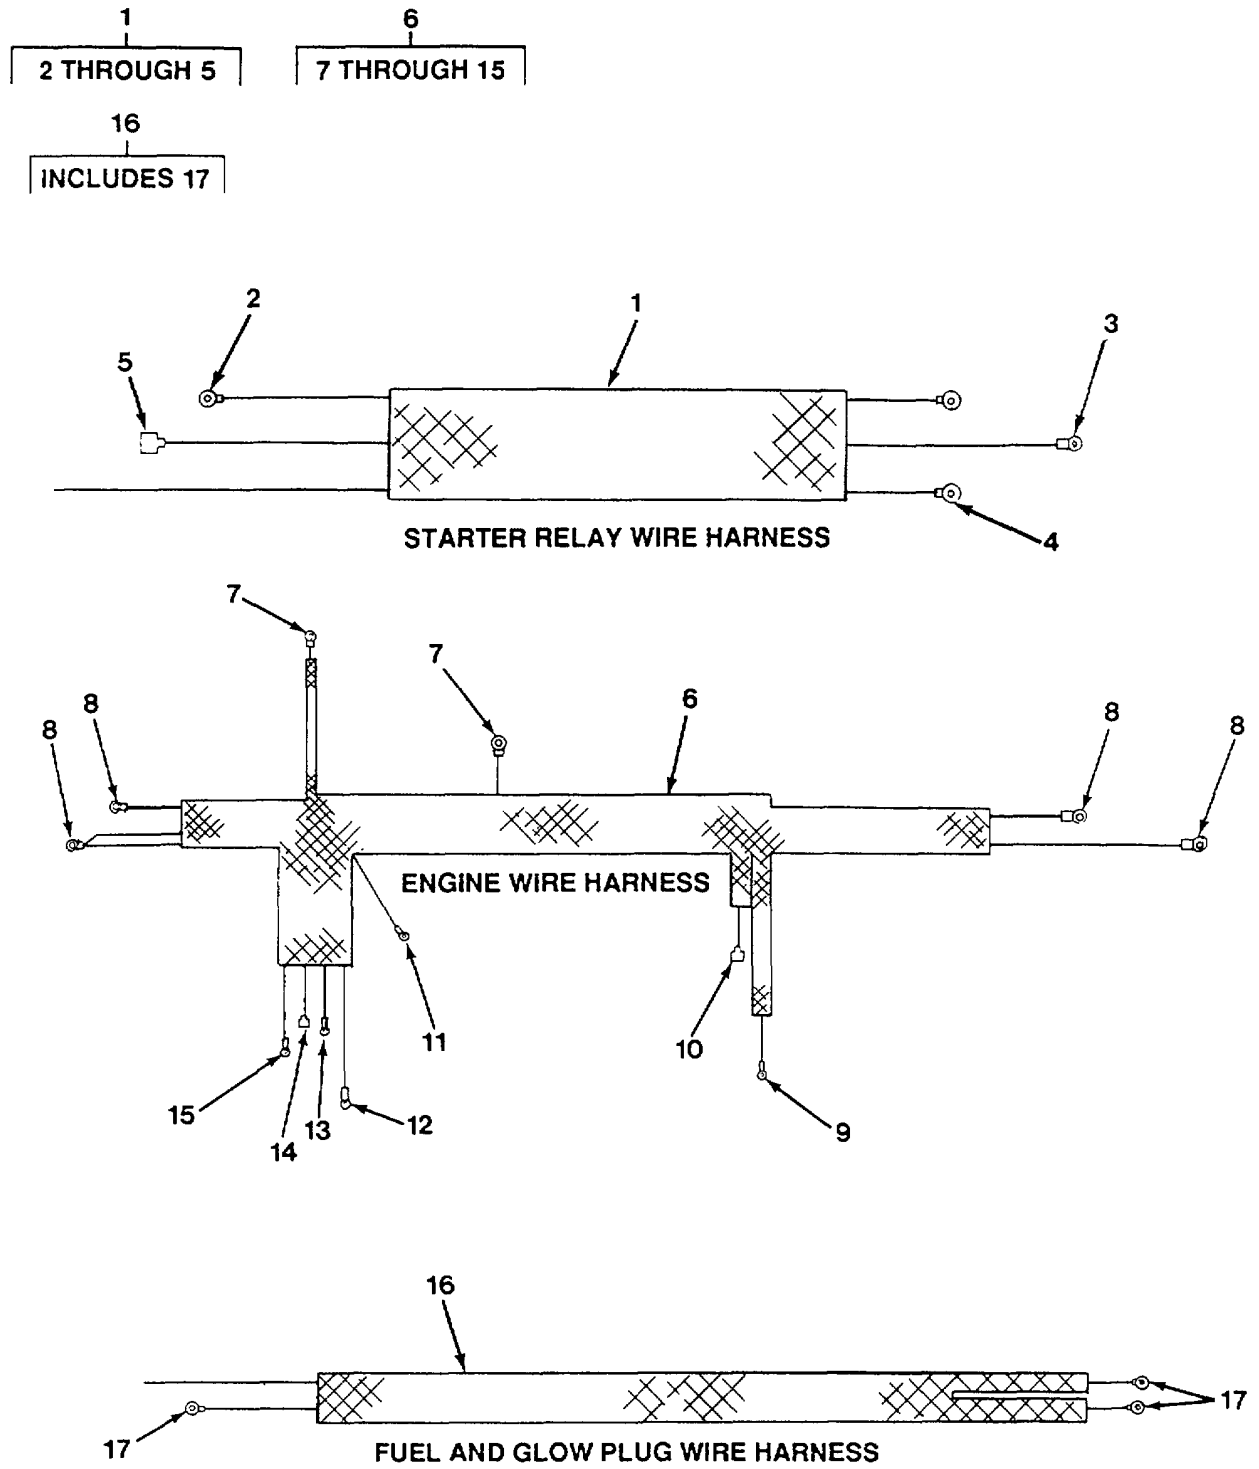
Starter Relay, Engine, and Fuel and Glow Plug Wire Harnesses
